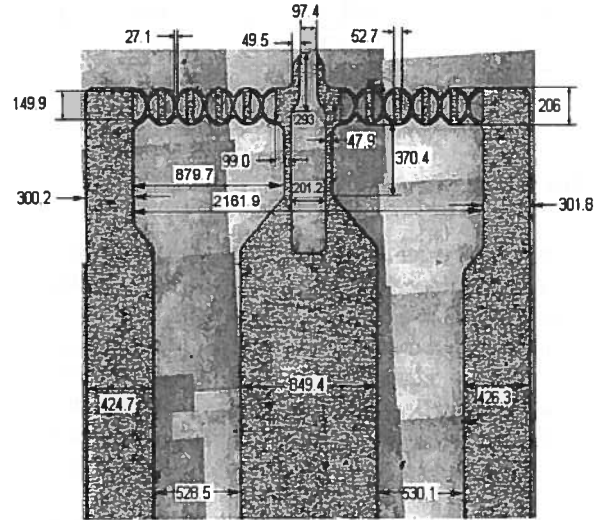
Fabricated nickel prototype (dimensions in μ m)
